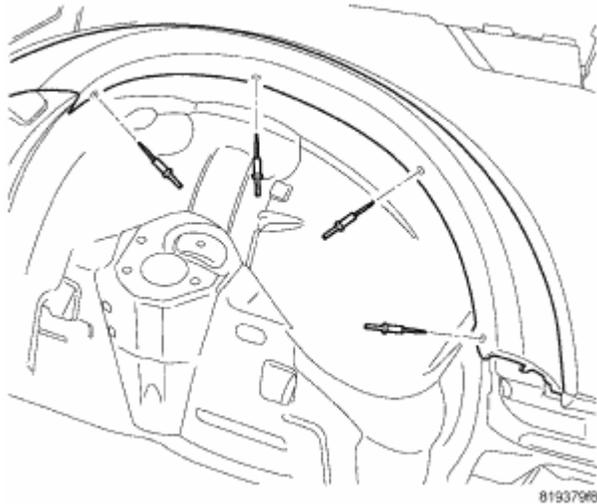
Removing/Installing Rivets Connecting Fender Flare To Wheel House Liner
